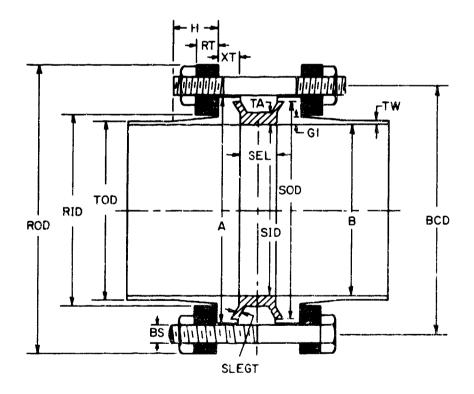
DIMENSIONS FOR CONNECTORS WITH LOOSE-RING FLANGES
